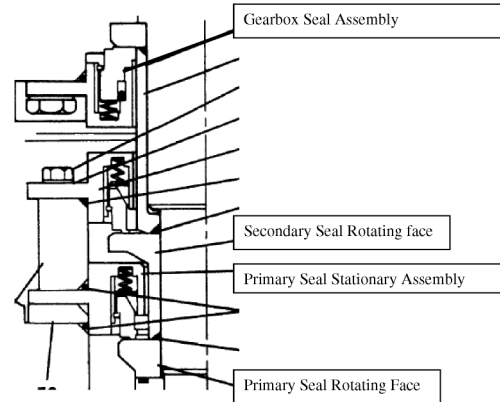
Tandem Pusher Process Seal with Stationary Springs.
